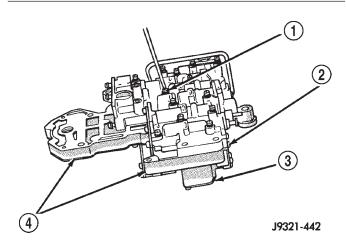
Installing Lower Housing On Transfer Plate And Upper Housing
